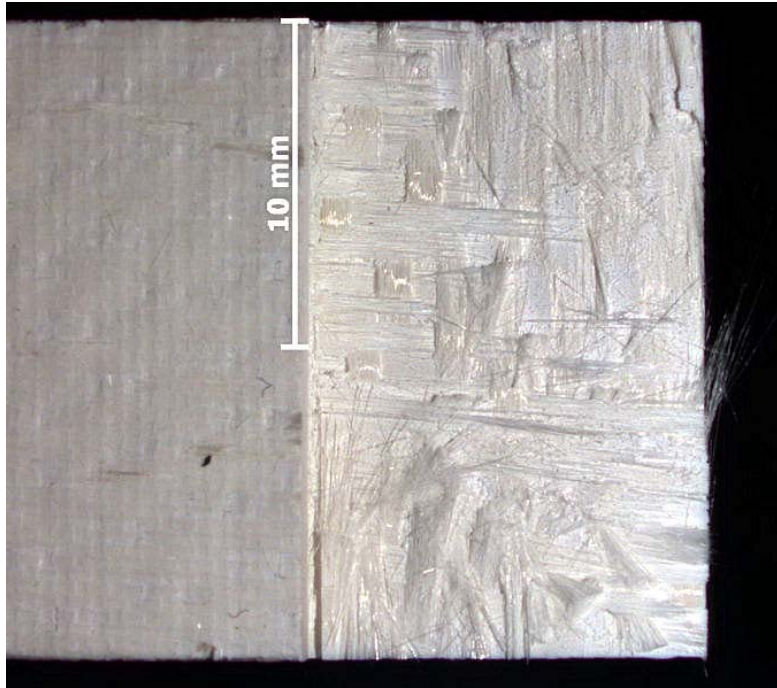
Fracture surface of N720/A specimen tested in tension to failure at 1200 °C in air, Piece A.
